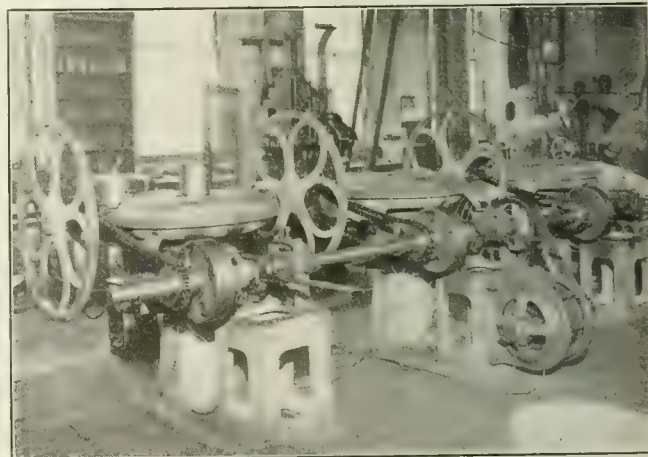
MOTOR ATTACHED TO PEDESTAL OF ONE MACHINE AND DRIVING SEVERAL UNITS
